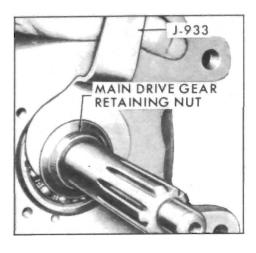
Removing Main Drive Gear Retaining Nut
